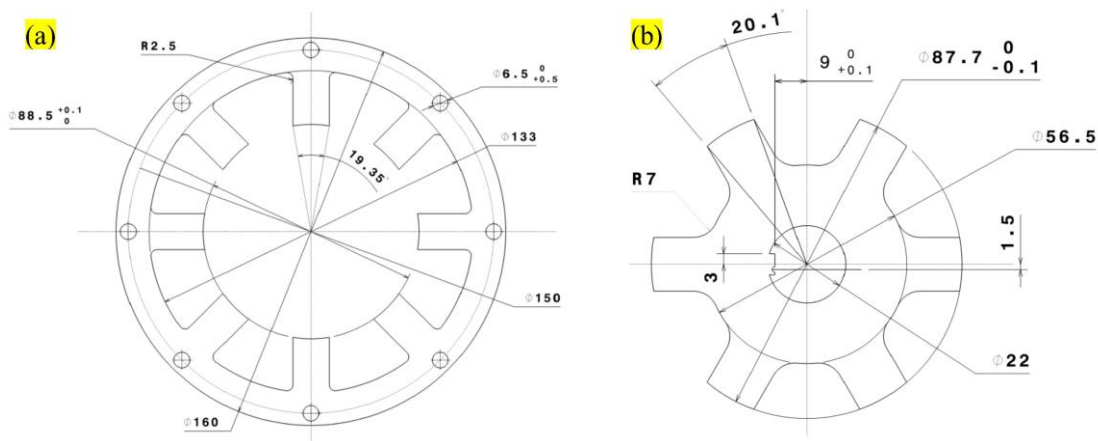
Drawings for fabrication (a) Stator and (b) Rotor core
